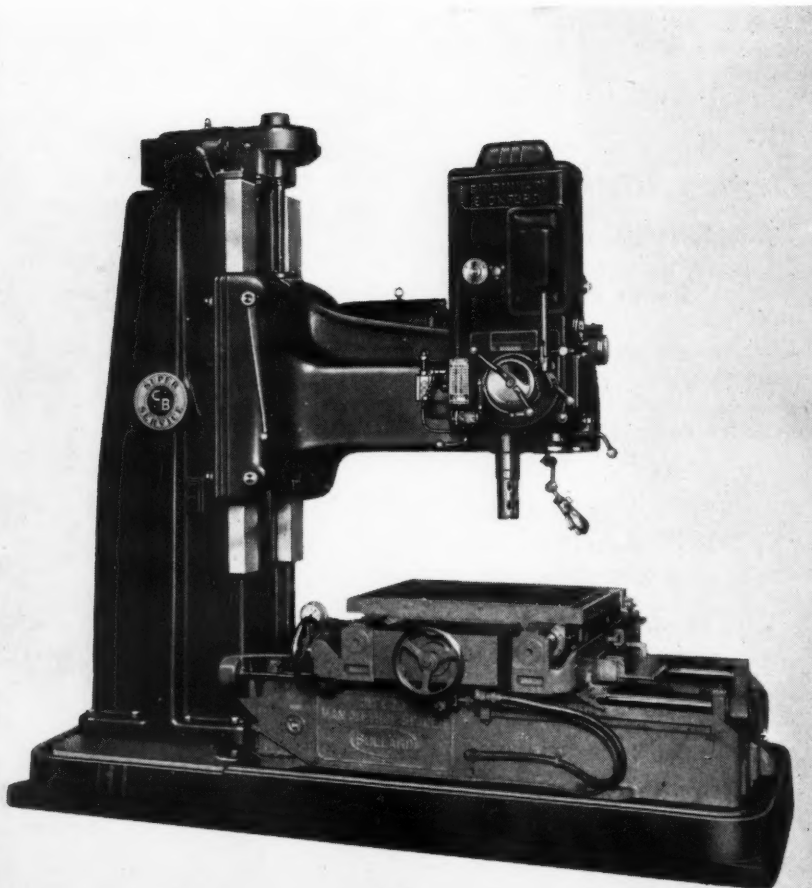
(Above) Cincinnati Bickford Radial Drilling Machine Equipped with Hydraulic Arm and Column Clamp
